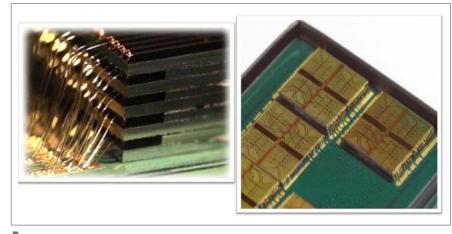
| Example of two multichip packages incorporating advanced die stacking techniques.
